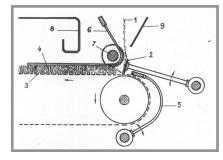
Vibrating perpendicular lapper: 1 - carded web, 2 - forming comb, 3 - conveyor belt of thermobonding chamber, 4 - perpendicular laid fibre layer, 5 - presser bar, 6 - wire grid, 7 - hold-back roller, 8 - cover of thermobonding chamber.
